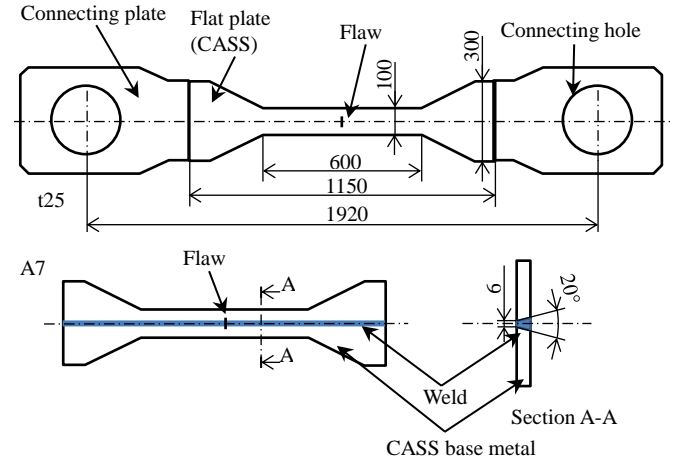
FLAT PLATE SPECIMEN FOR FRACTURE TEST
